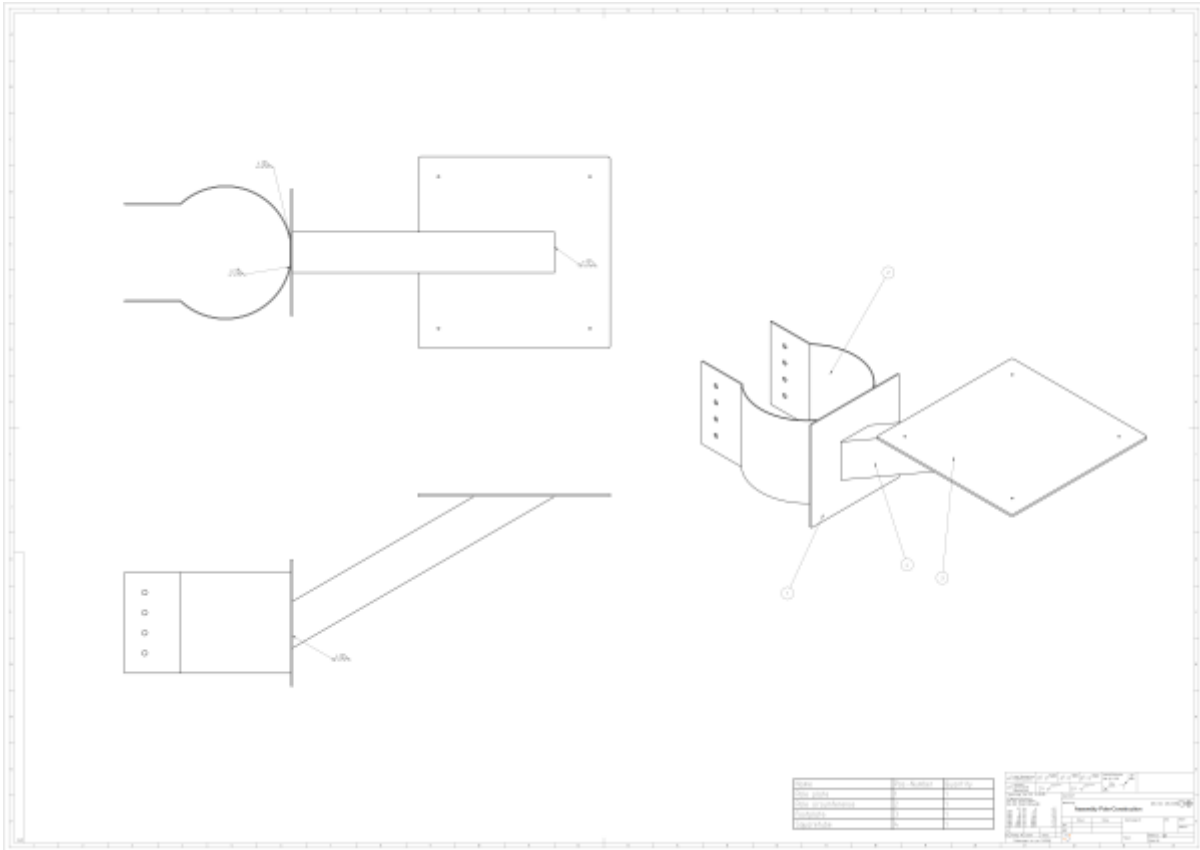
Detailed drawing of welded assembly of pole-construction
